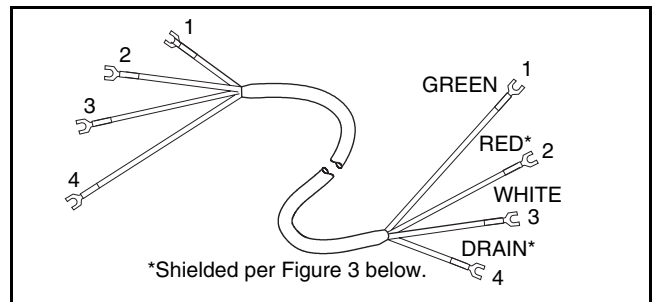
Extension Cable Assembly (Foxboro Part 0061101)
